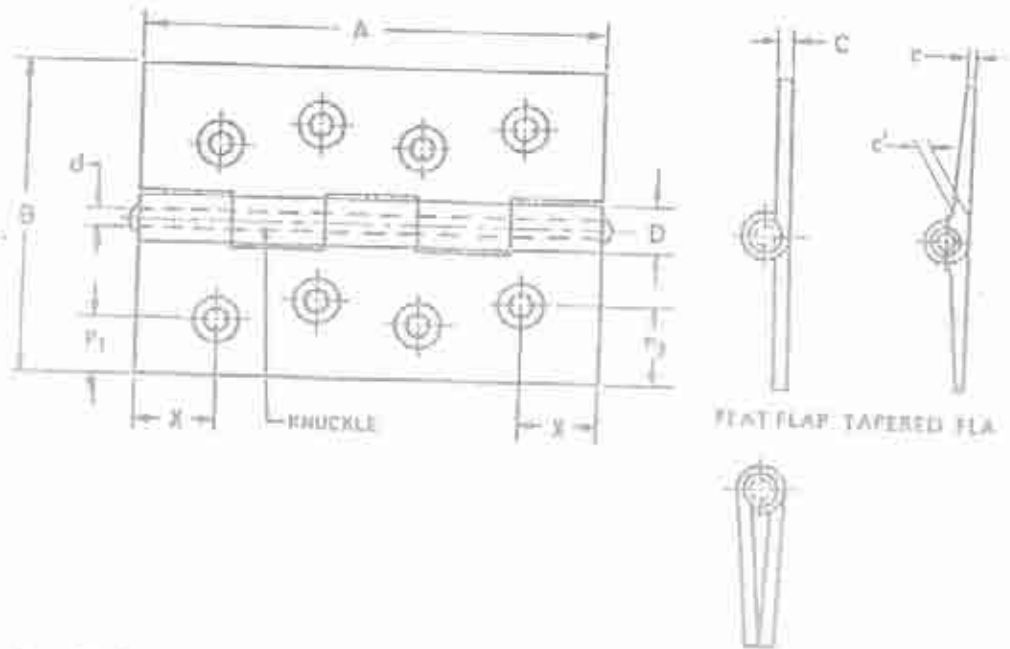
BUTT JOINTS (ALUMINIUM ALLOY, CAST BEADS OR EXTRUDED BRASS)
